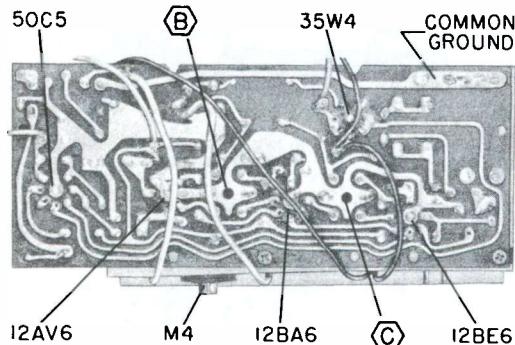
Bottom View of 5D4 Chassis Showing Alignment Points and Tube Locations. 5B4 chassis has same location for tubes and alignment points. Common ground is also the same.
